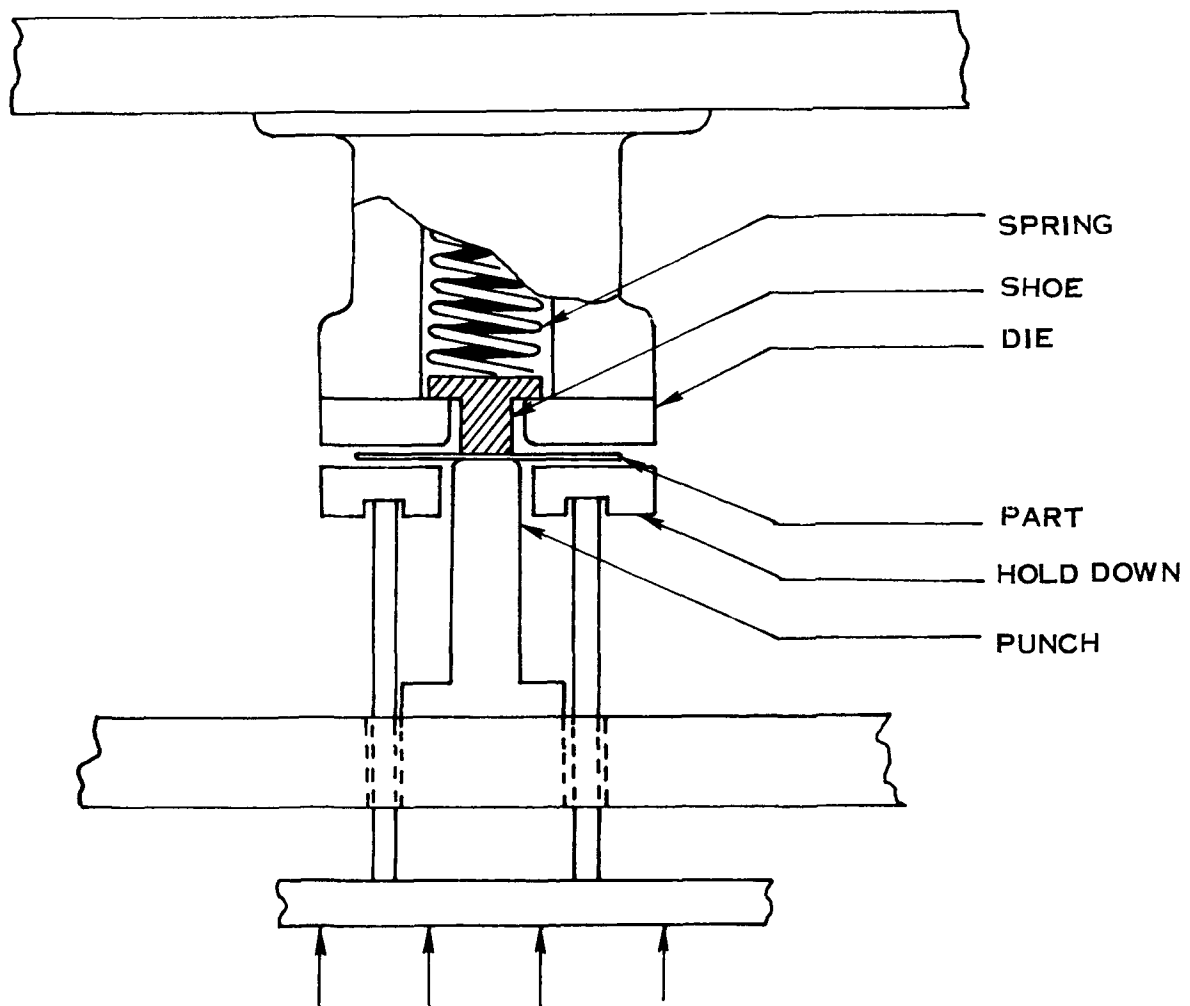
SCHEMATIC OF DRAW PRESS AND TOOLING
